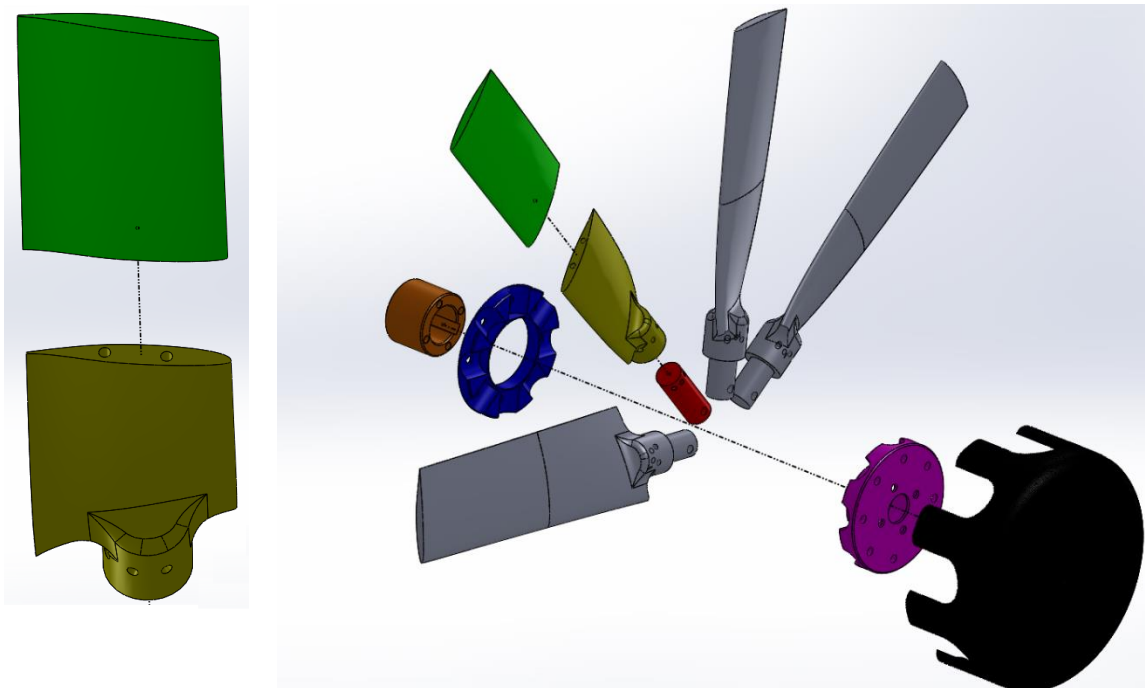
Final Blade geometry (Left) and half-impeller assembly (Right)
